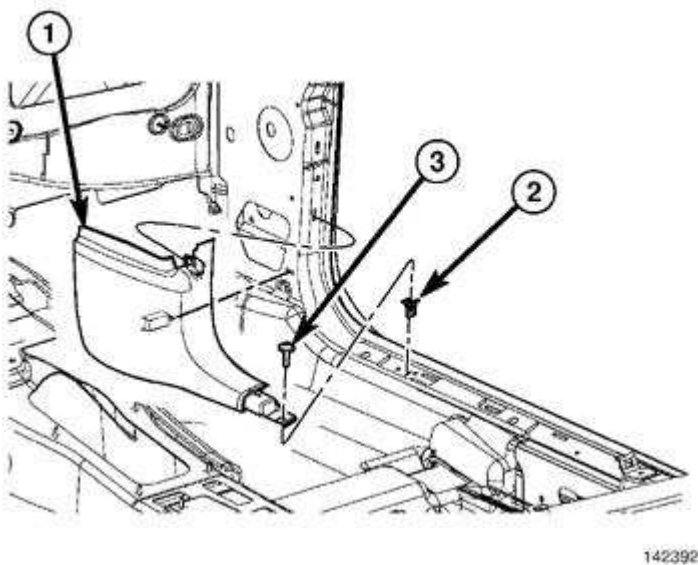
Removing/Installing Lower Cowl Trim Panel
